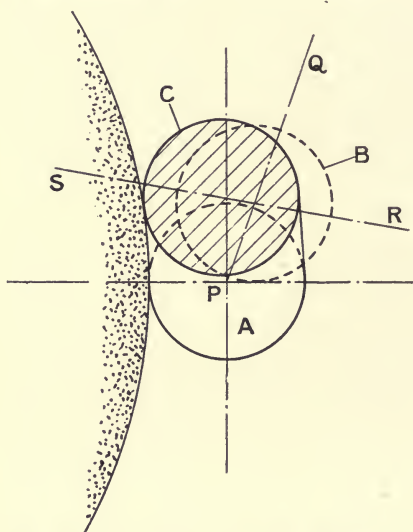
SPRINGING SLENDER WORK FOR GRINDING
